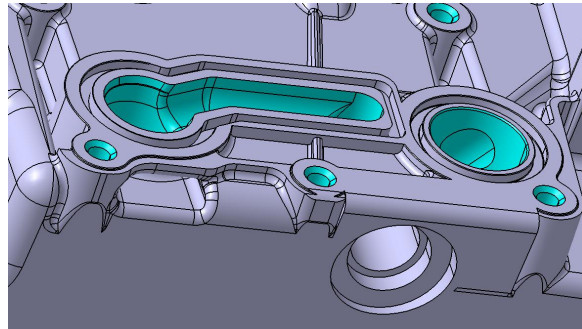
Bottom view of oil pan with mounting hole for bypass valve.
